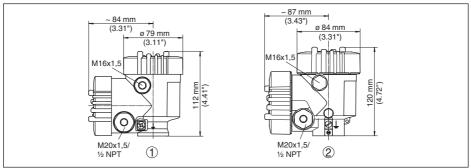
Dimensions of housing (with integrated display and adjustment module the housing is 9 mm/0.35 inches or 18 mm/0.71 in higher)
